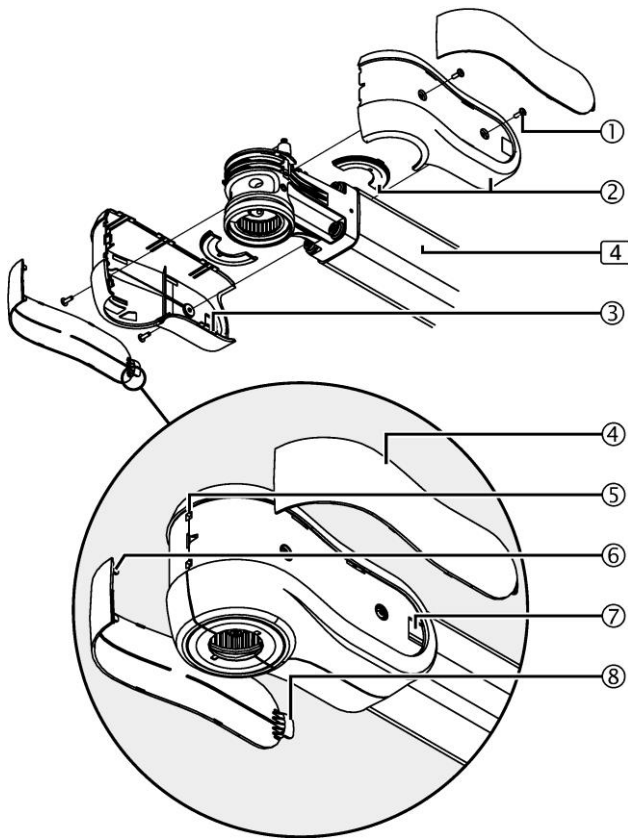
Mounting the socket covers and decorative caps to the Extension Arms
